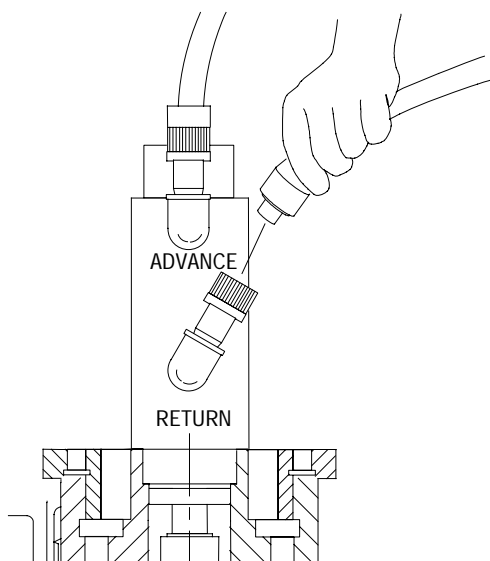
Turbine Rear Hub Assembly - Installation (Sheet 2 of 4)
